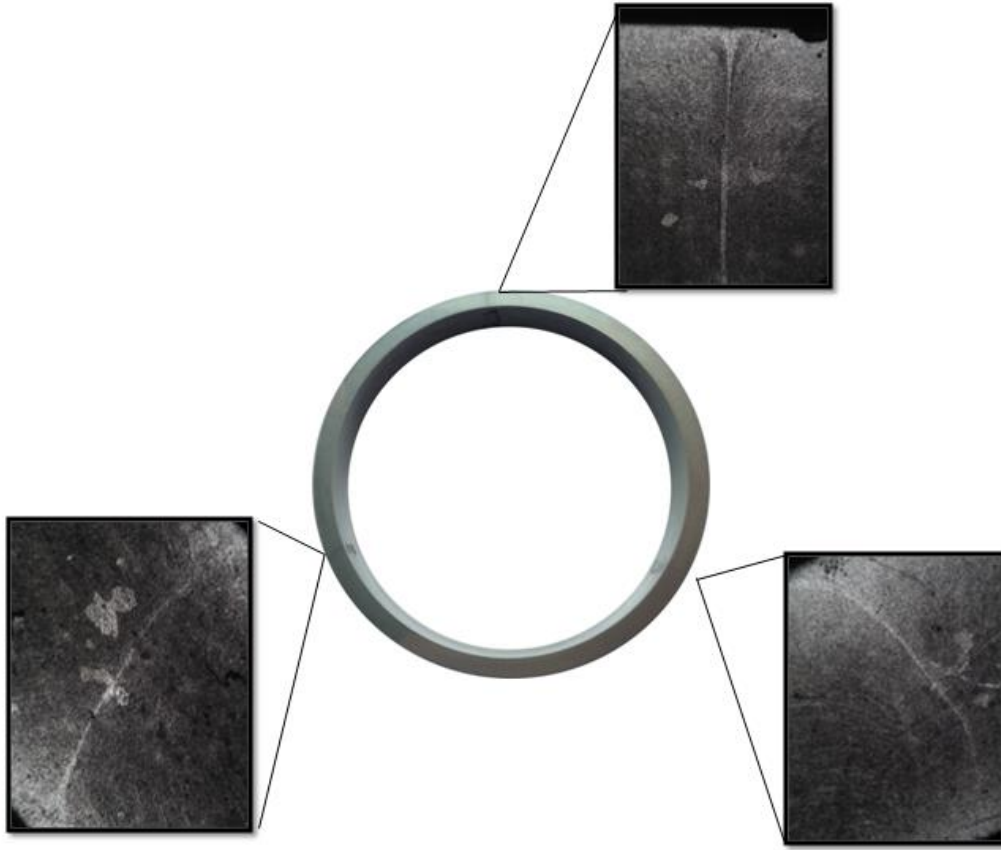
Micrographs of cold-weld lines from cold-extrusion of the aluminum tubes exposed using a Keller's reagent to etch polished specimens.
